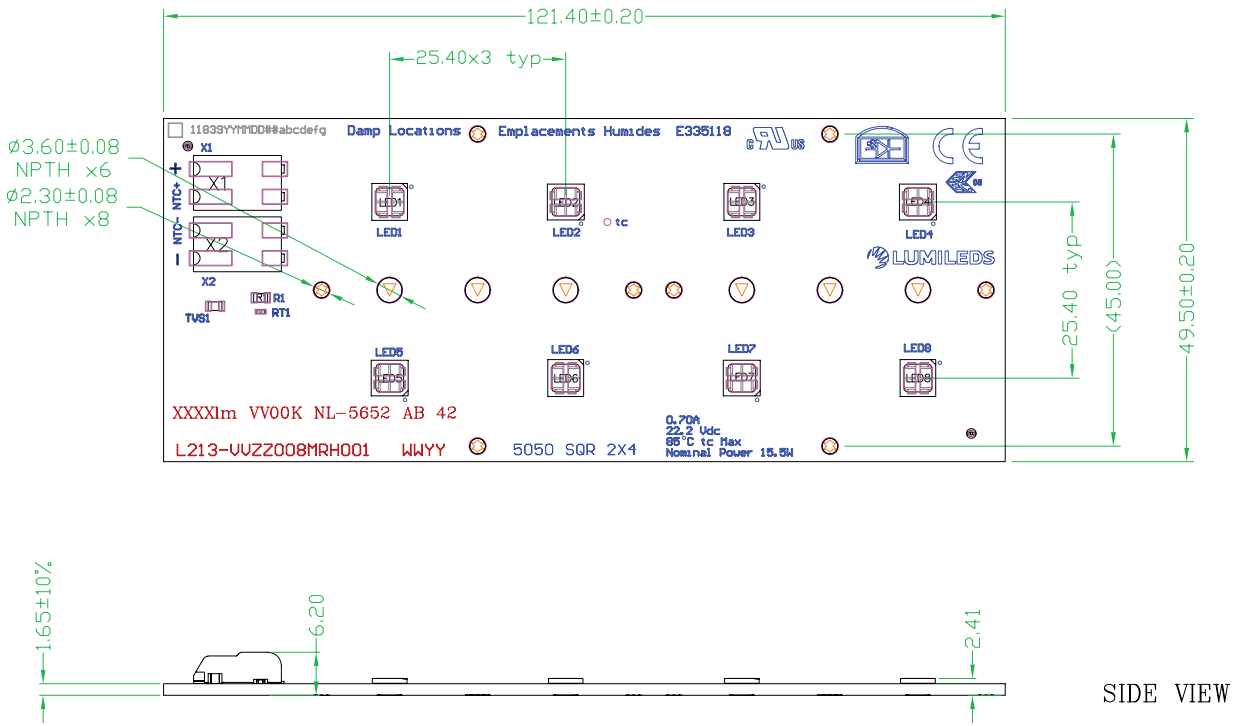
Mechanical dimensions for L213-xxxx008MRH001.
